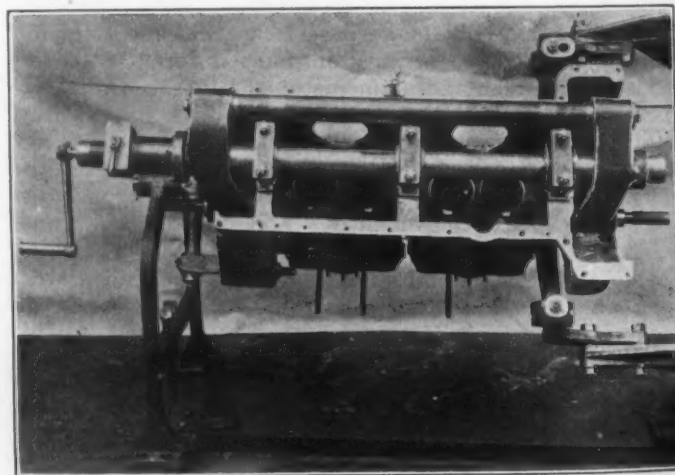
MAIN-BEARING BORING-FIXTURE SET FOR WORK
